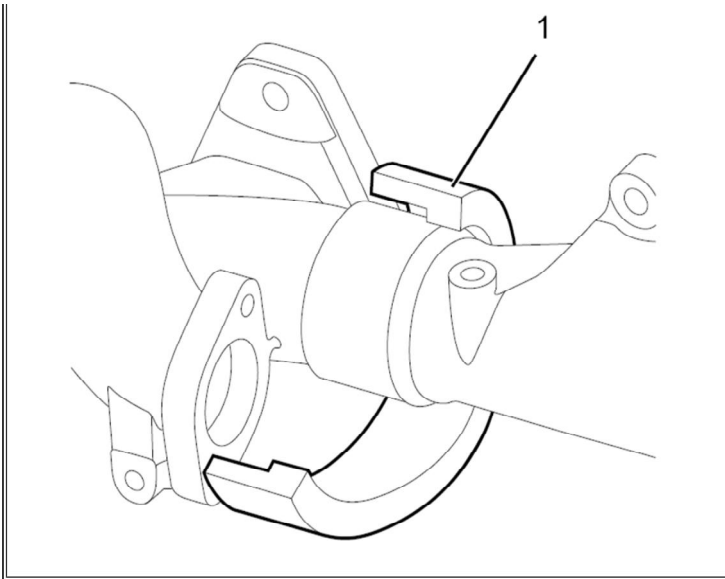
Front Exhaust Manifold Ring Seal Ceramic Mat Wrap
